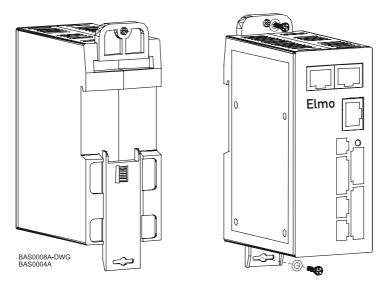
Extending the Mounting Strips and Attaching the Screws
